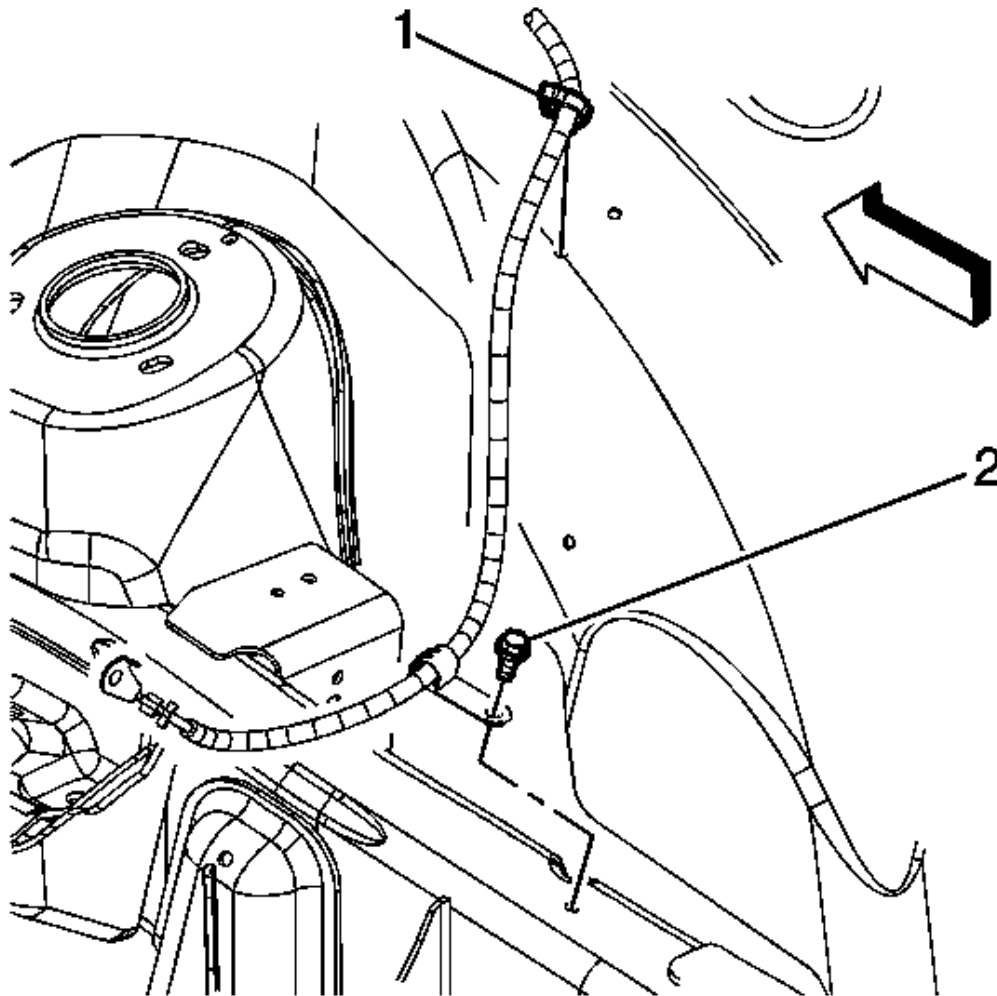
View Of Starter Solenoid Cable Clip & Bolt
